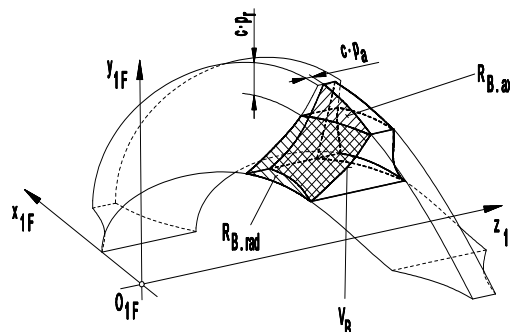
Surfaces and cutting edge of the tooth of the hob in the K_{1F} motion coordinate system (Dudás, 2004)
